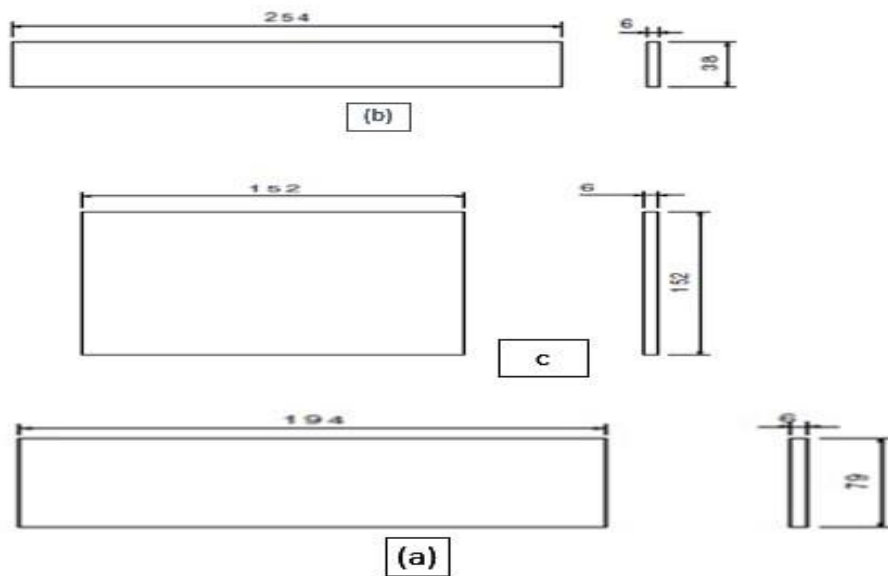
a) Bending test, b) Tensile test and c) WA and TA specimen dimensions.
